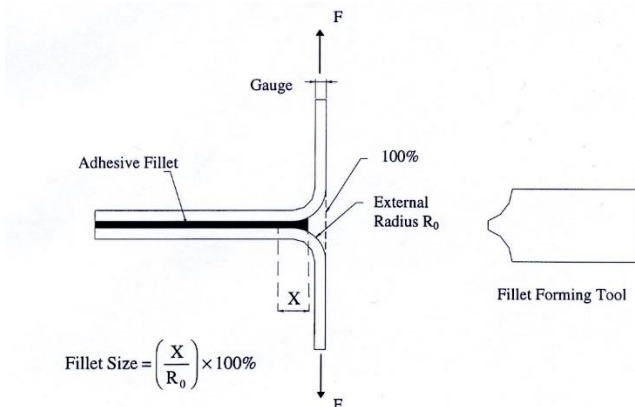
Definition of fillet size in T-peel joint [51] – including fillet forming tool
